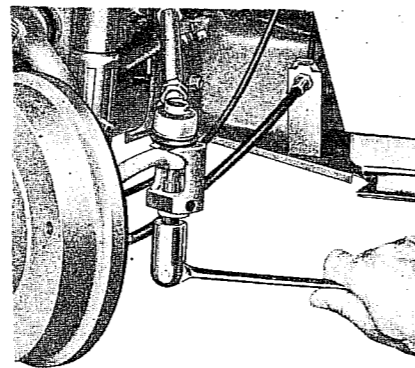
Disconnecting the track rod ball joint from the steering arm.
